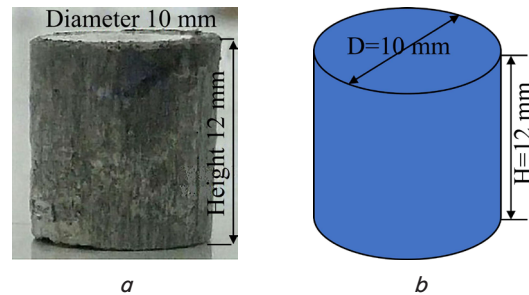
Prepared samples: a – test samples for hardness; b – pin on disc wear
